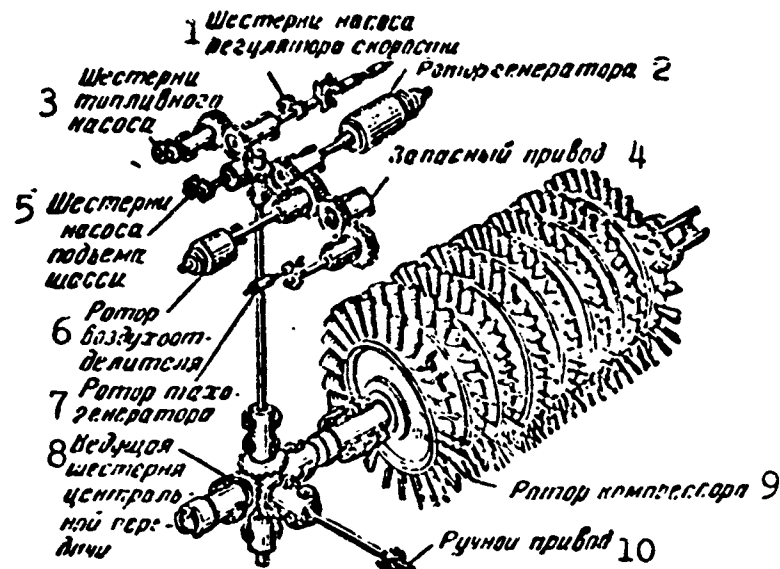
Generator driven by jet engine. 1) Speed-control pump gears; 2) generator rotor; 3) fuel-pump gear; 4) extra drive mechanism; 5) landing-gear-retraction pump gears; 6) rotor of air separator; 7) rotor of tachometer generator; 8) drive gear of central transmission; 9) compressor rotor; 10) manual drive.
